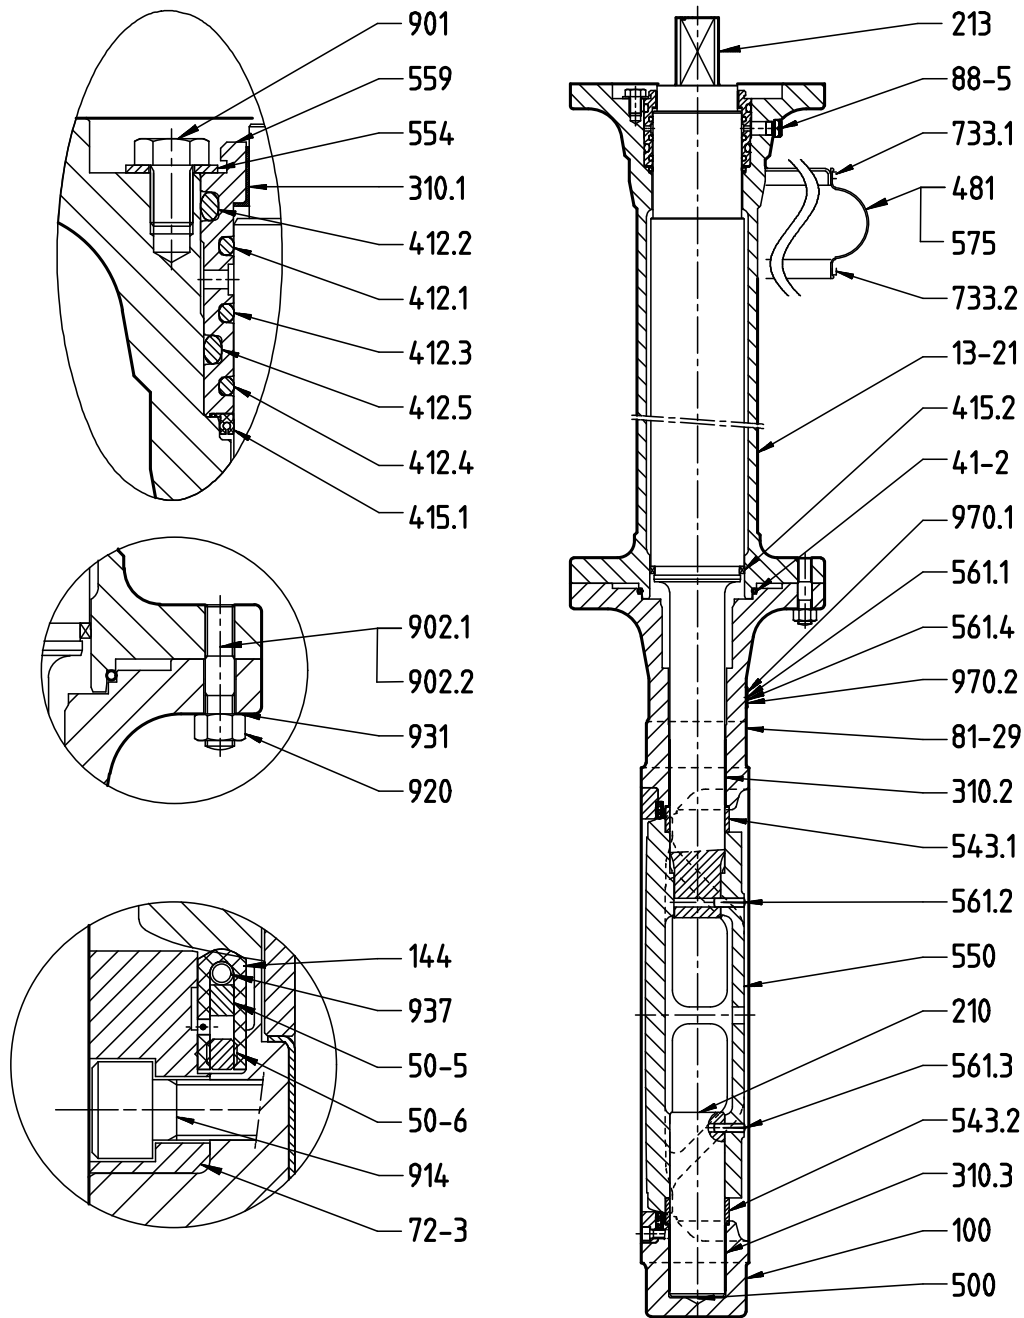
Sectional drawing of DANAIS CRYO AIR with plastomer seat DN 400-600 (16 - 24 inches)
